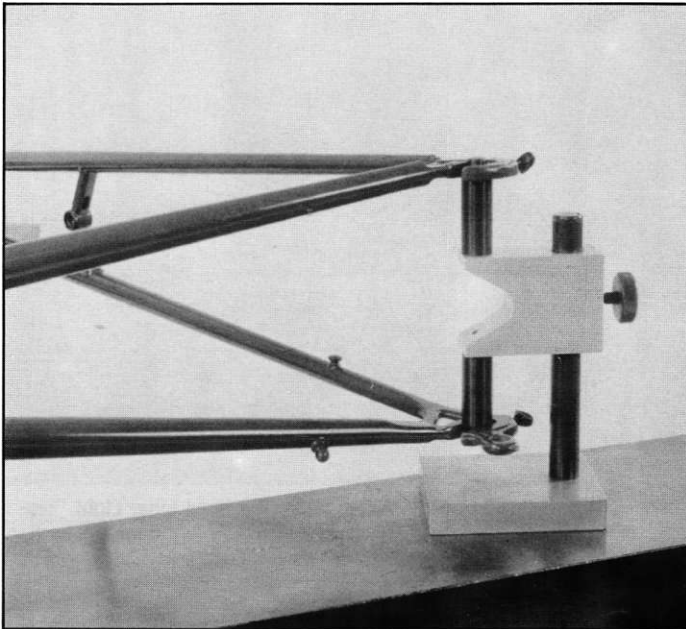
Height gauge for rear dropouts, after alignment on the seat tube, is used to check position of rear dropouts.
